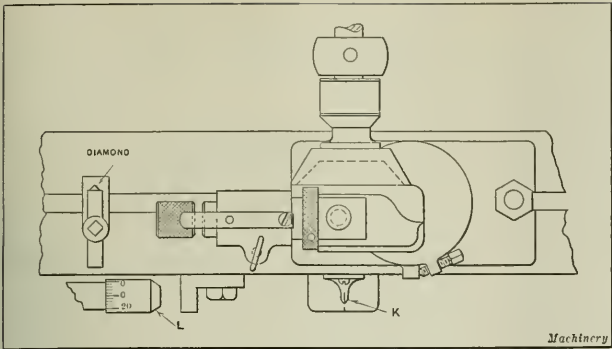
Plan View of Reamer-grinding Fixture shown in Fig. 1
